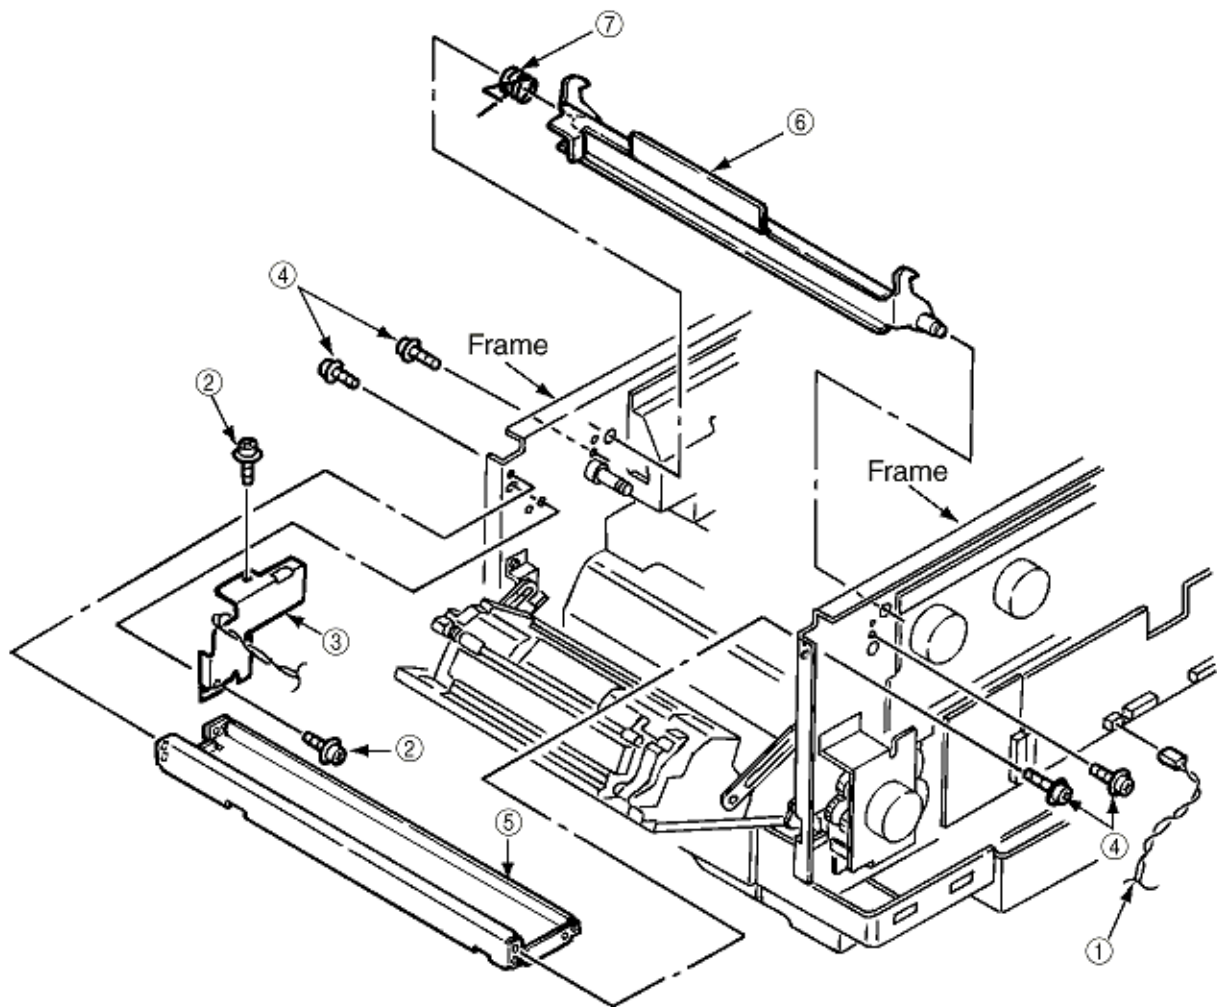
Plate Latch Lever (FD), Spring Latch Lever (FD)
